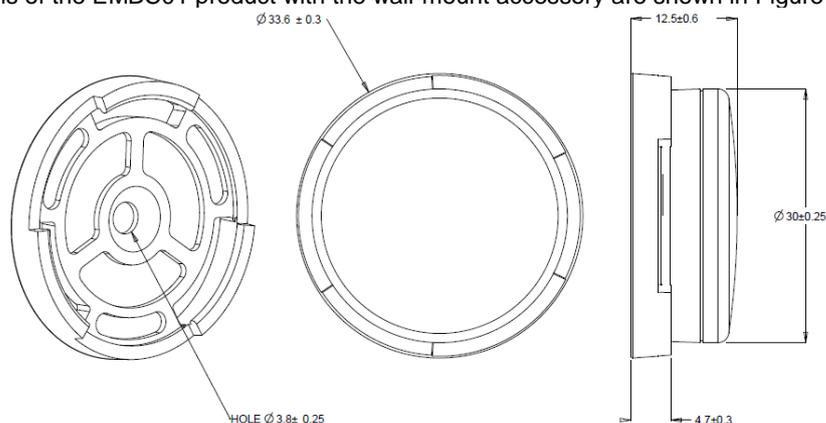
EMBC01 product with wall-mount accessory outline dimensions
